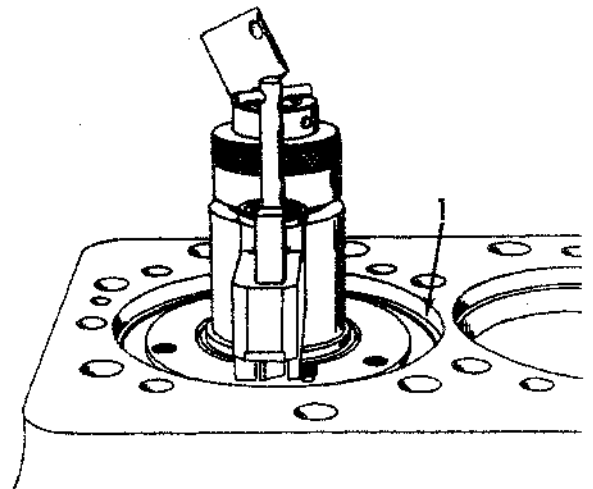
Cylinder Sleeve Reseating Tool Installed (T-51391)
